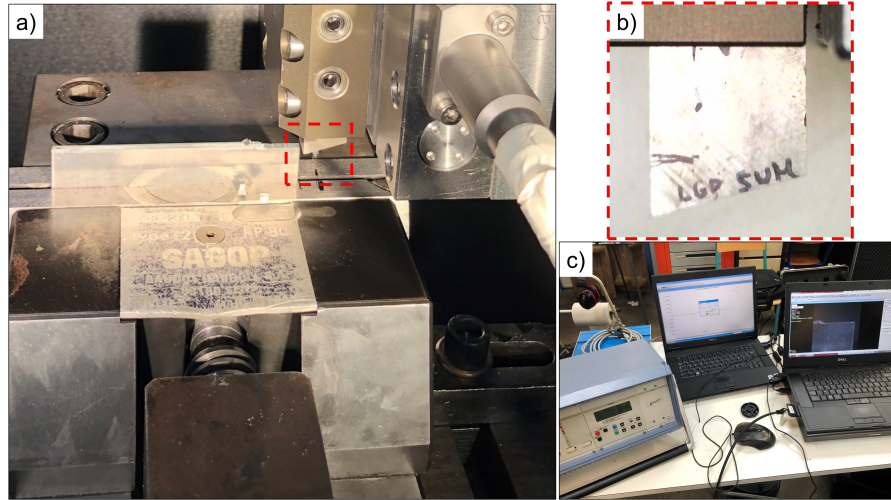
Experimental setup a) Lathe machine, b) tool detail, c) acquisition systems (forces and high speed cameras).
